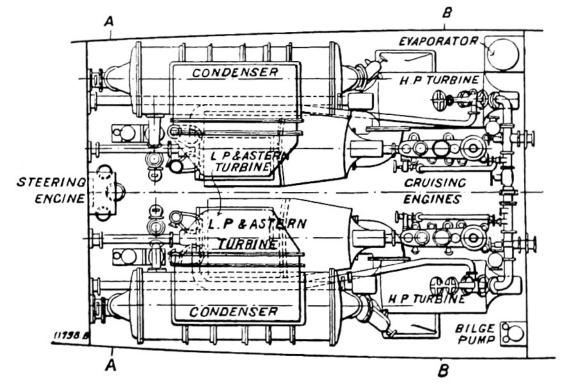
Plan view of the machinery layout of HMS *Velox* (Source: Wikipedia - public domain)
